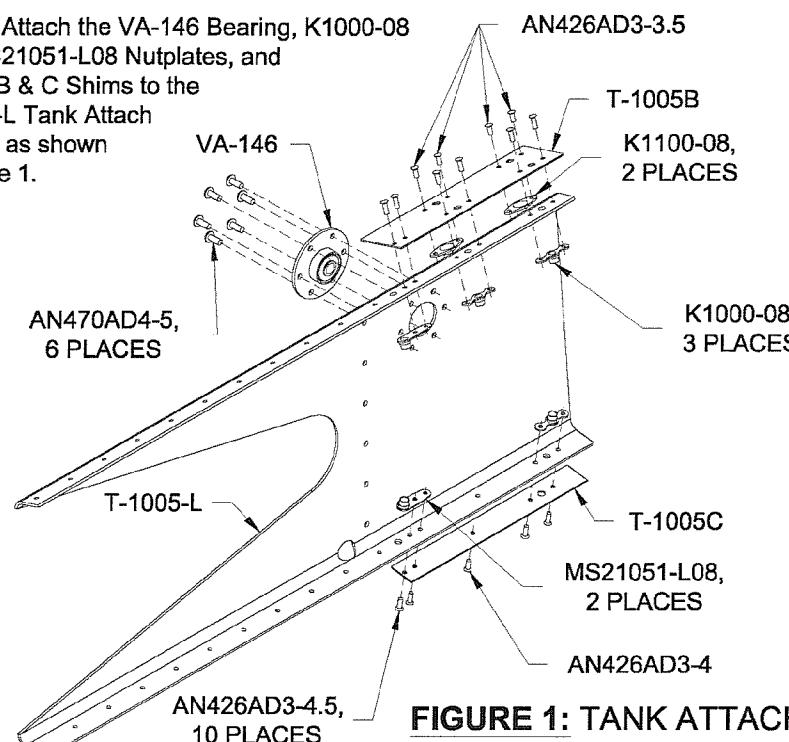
TANK ATTACH BRACKET SUB-ASSEMBLY
